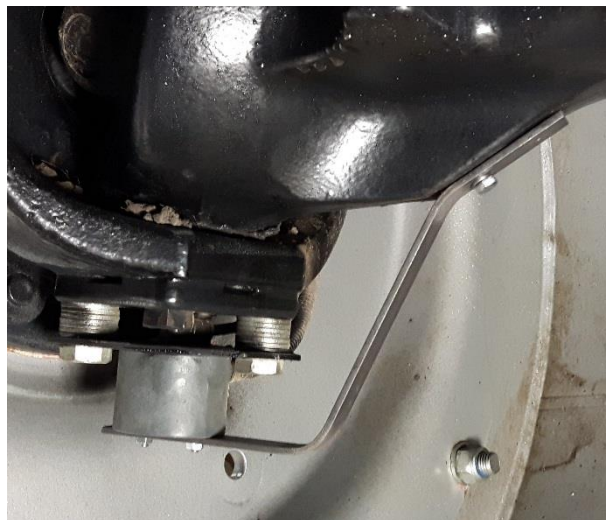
STRIP ON THE FRONT AXLE WITH ONE BOLT.
